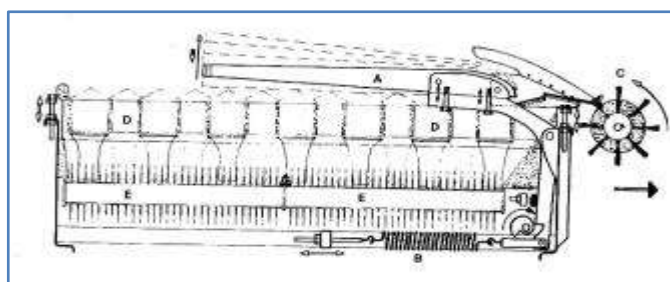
schematic of rod mechanism: A) impact rod; B) spring; C) brush roller; D) intercepting frame; E) roller conveyer
